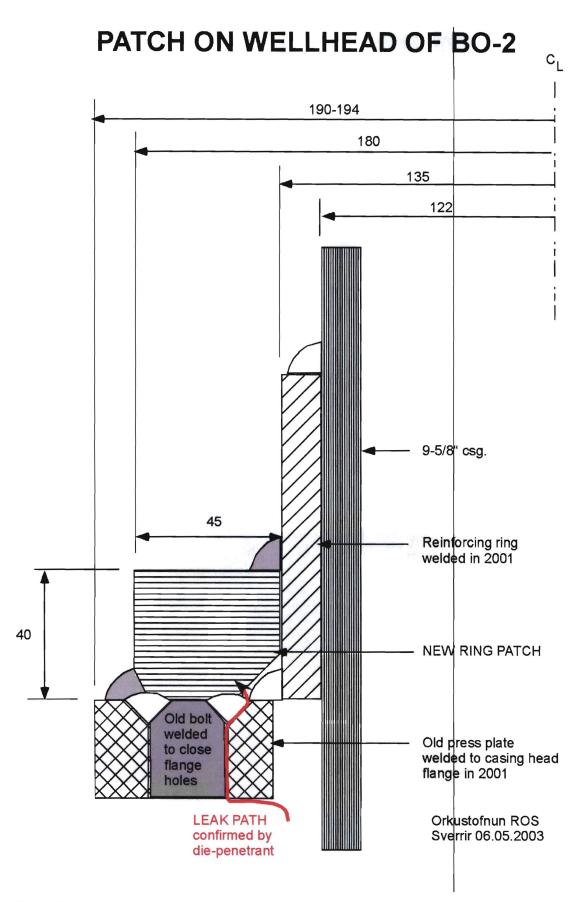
Drawing shows where the leak was – a pinhole defect of a weld. The drawing also shows the design of the ring-patch to cover the leak. The patch was welded in place May 6^{th} .
